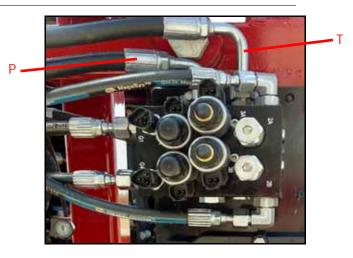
Pressure Hoses with Tee Fitting Installed on Machine Hydraulic Valve
